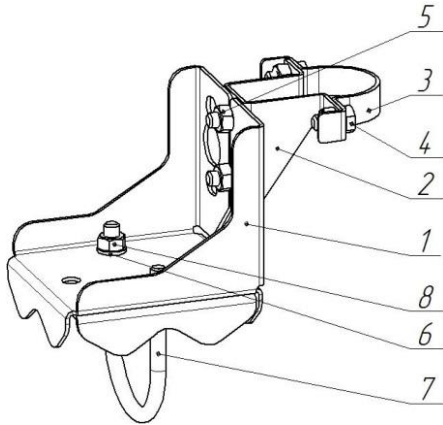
Steel corner bracket. Mounting kit type 1
